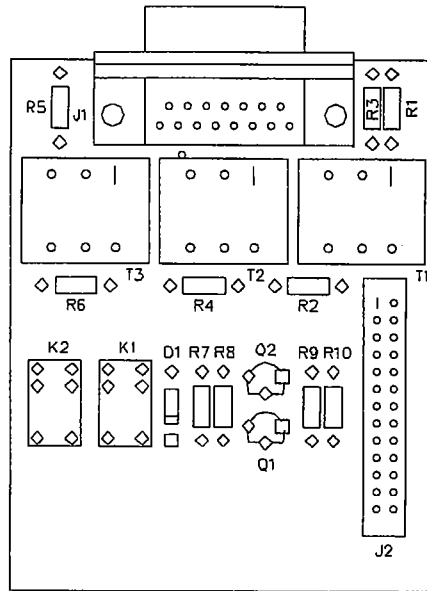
Assembly Drawing—OPT-100 Module
